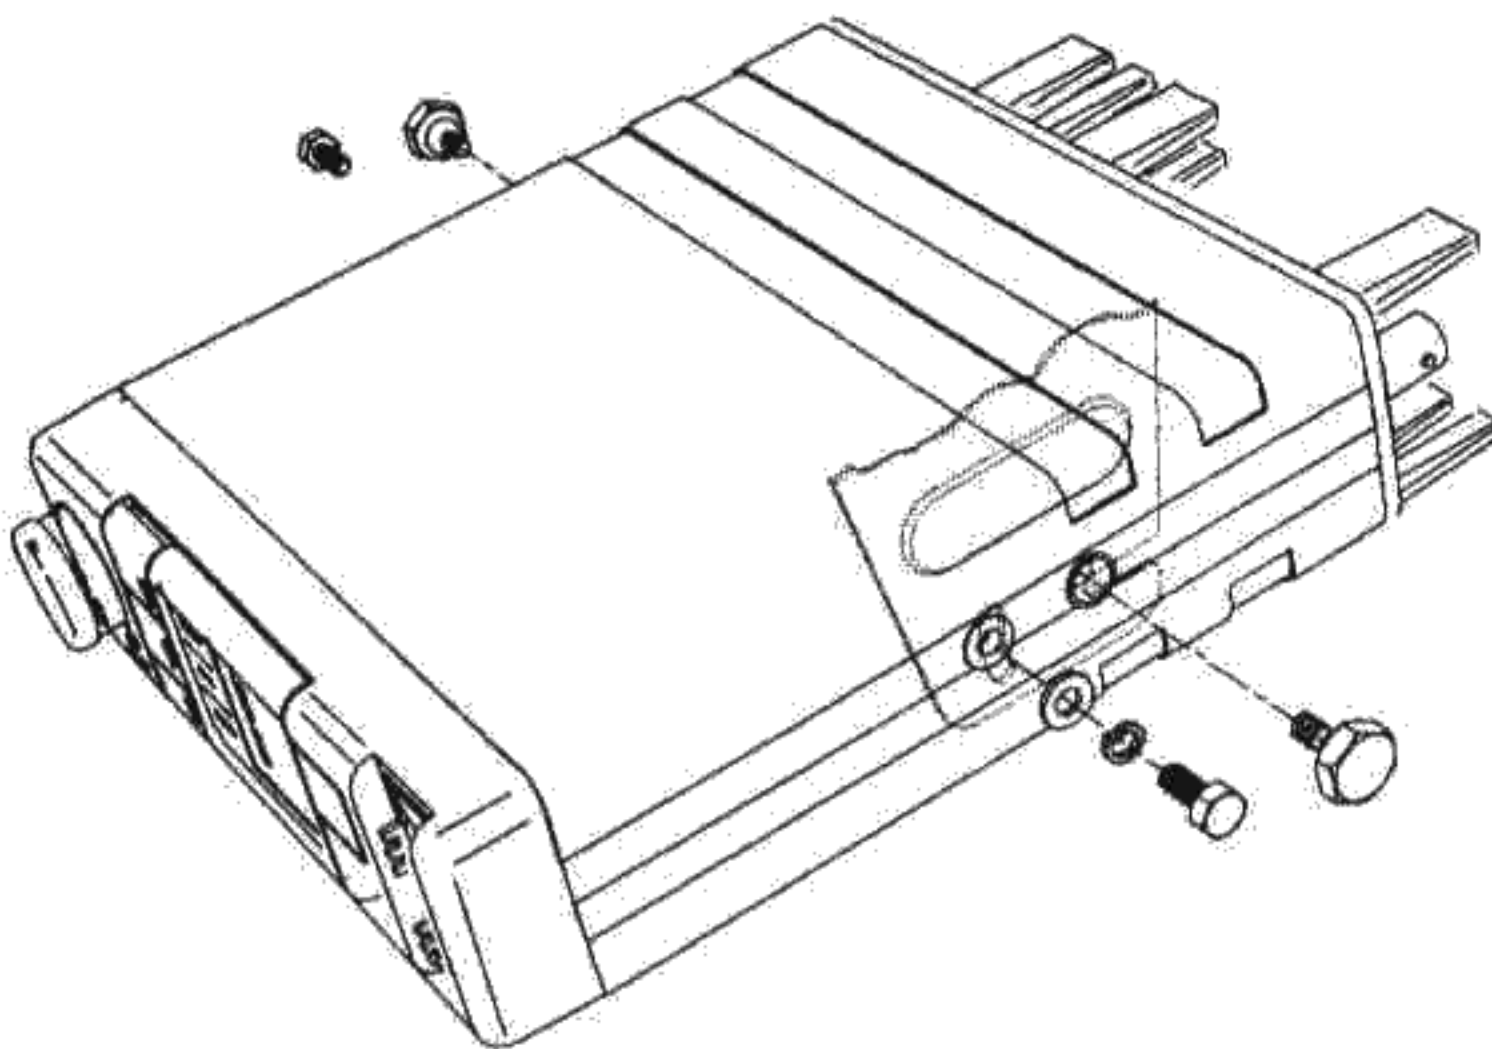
TRANSCEIVER / CRADLE - ASSEMBLY DETAIL
